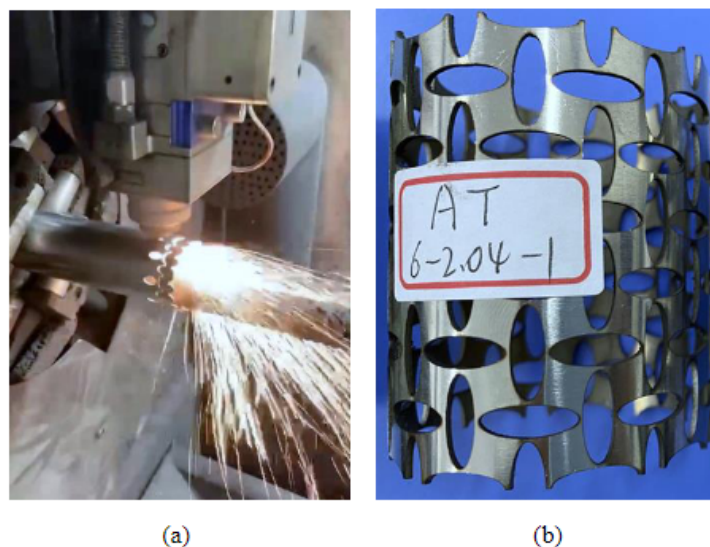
The cutting process and the fabricated specimens of auxetic tubes: (a) laser cutting; (b) auxetic tube (adapted from [50]).
